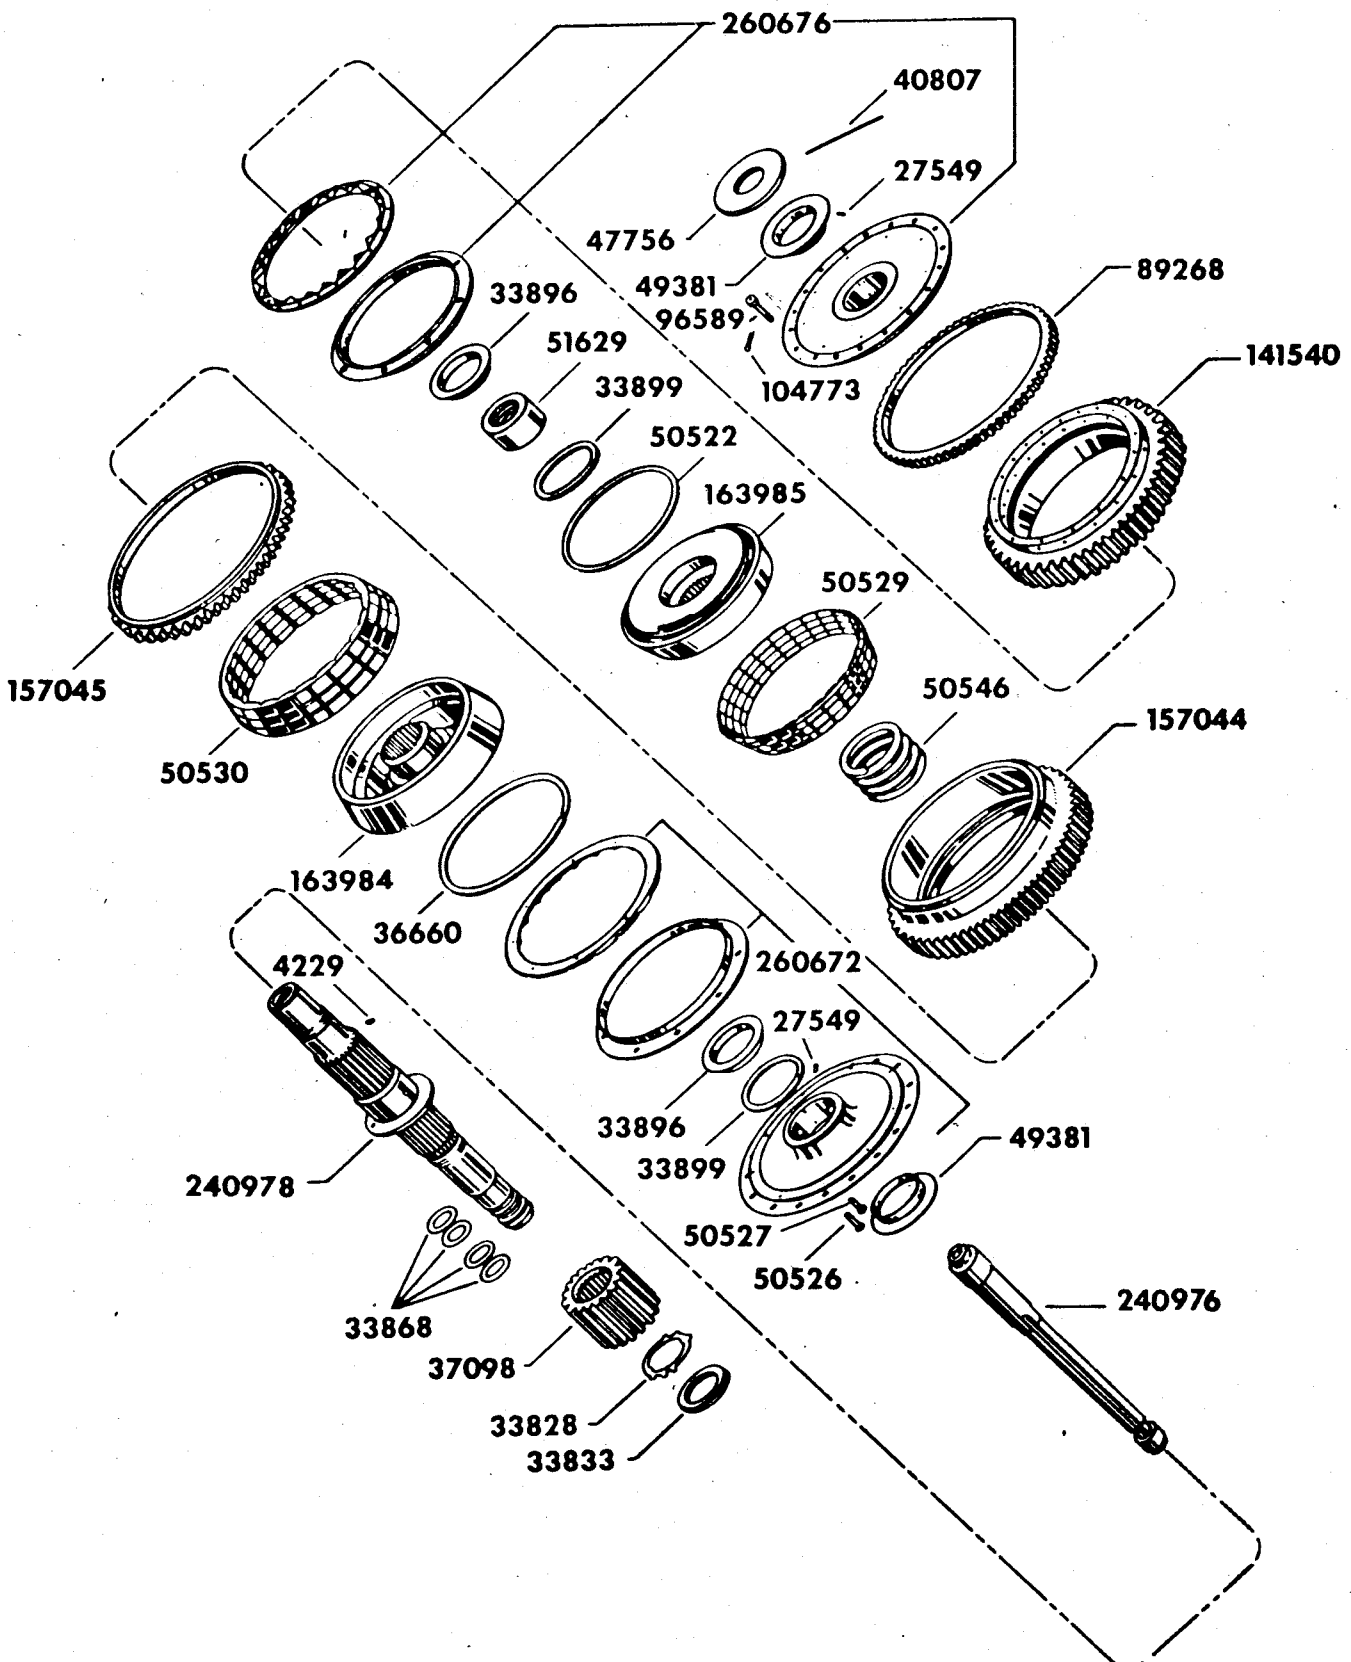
Clutches — (For CB16, CB17, CA15 and CA18 Engines Only). Collector Intermediate Gear — (For CA3 and CB3 Engines Only).
